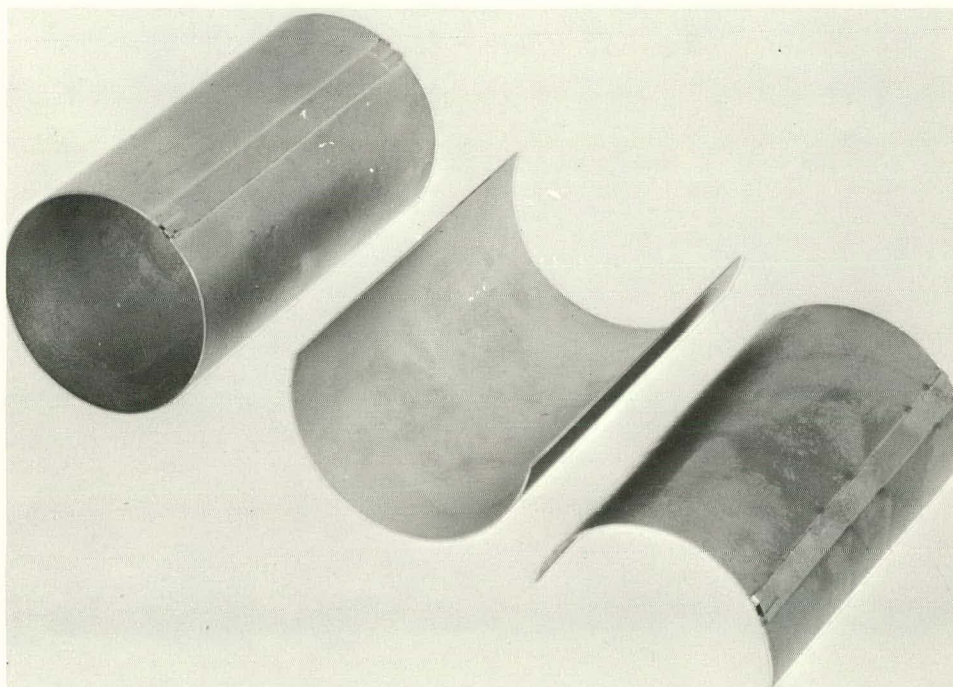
Typical 80Ni - 20Cr fuel ring prior to sectioning. Center segment is ready for edge sealing and roll forming (Neg. P62-6-17F)
